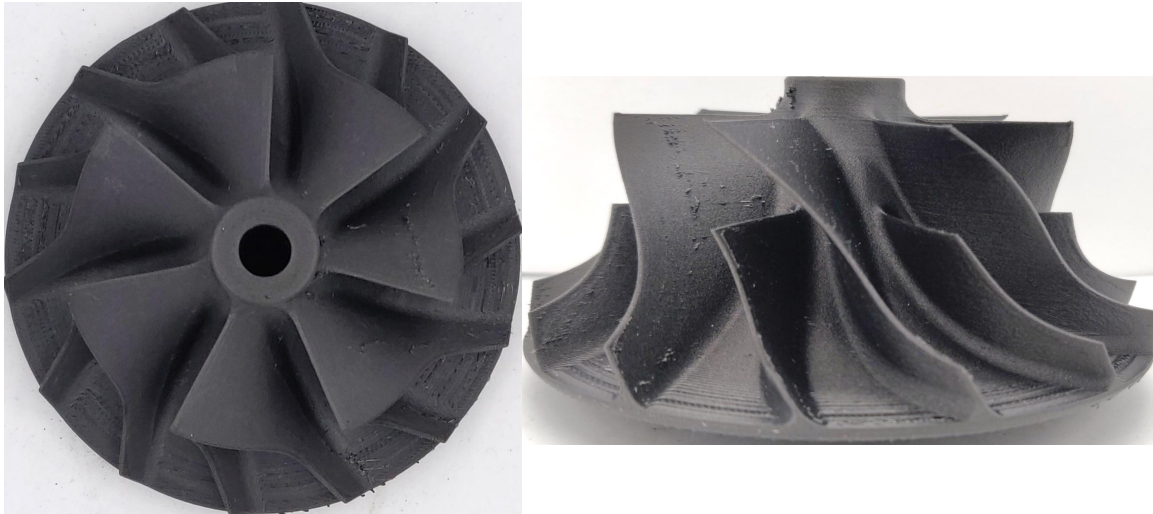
Printed Modified P400 Compressor, Onyx-Carbon Fiber
